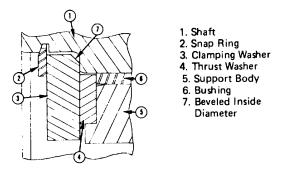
K-5. Water Pump Drive Clamping Washer Installation
